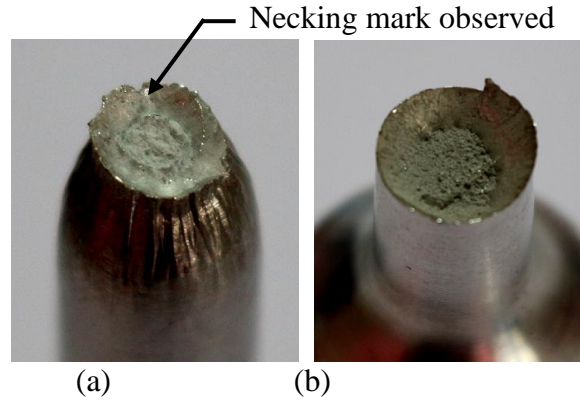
Fracture surface condition after tensile test for aluminium alloy (a) AA6061; (b) AA7075.
